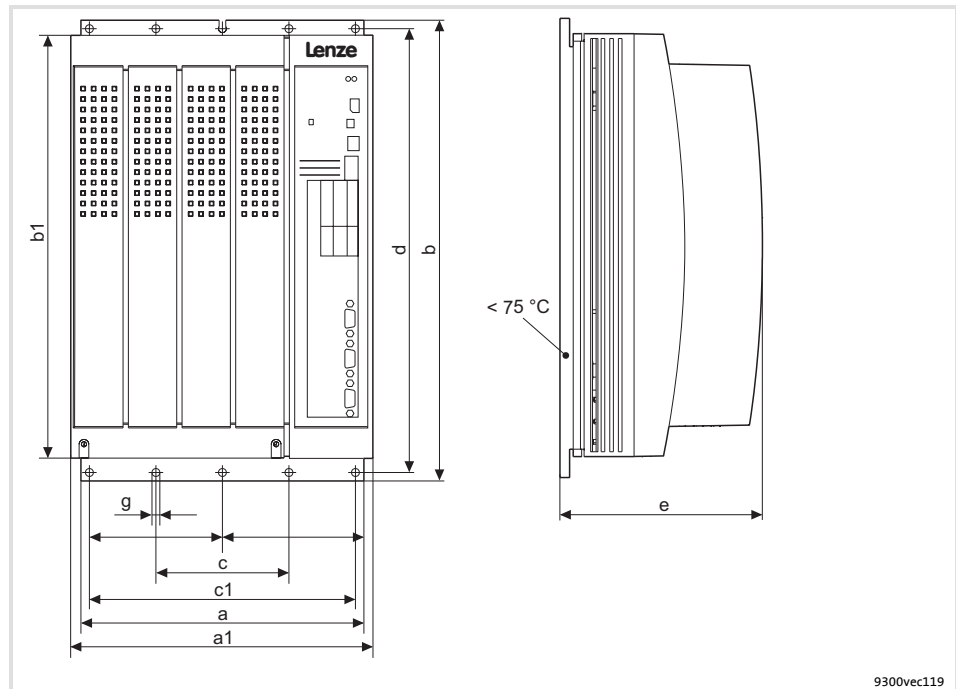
Dimensions for mounting in "cold plate" technique 15 ... 22 kW
